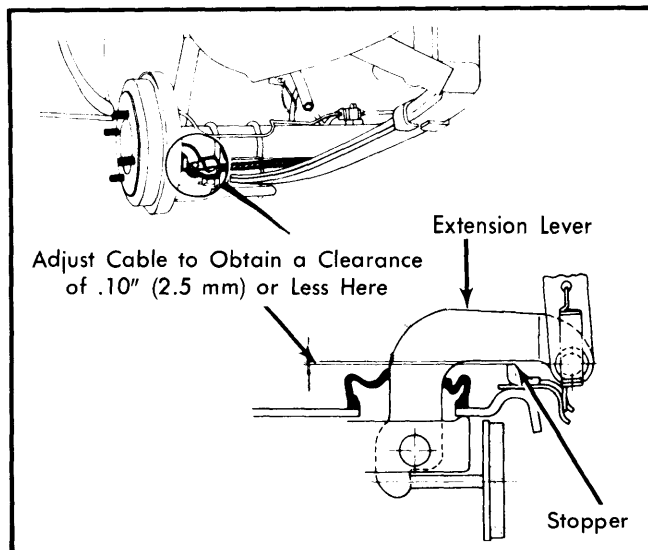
Adjusting Parking Brake on Challenger, Sapporo and Colt St. Wgn.
